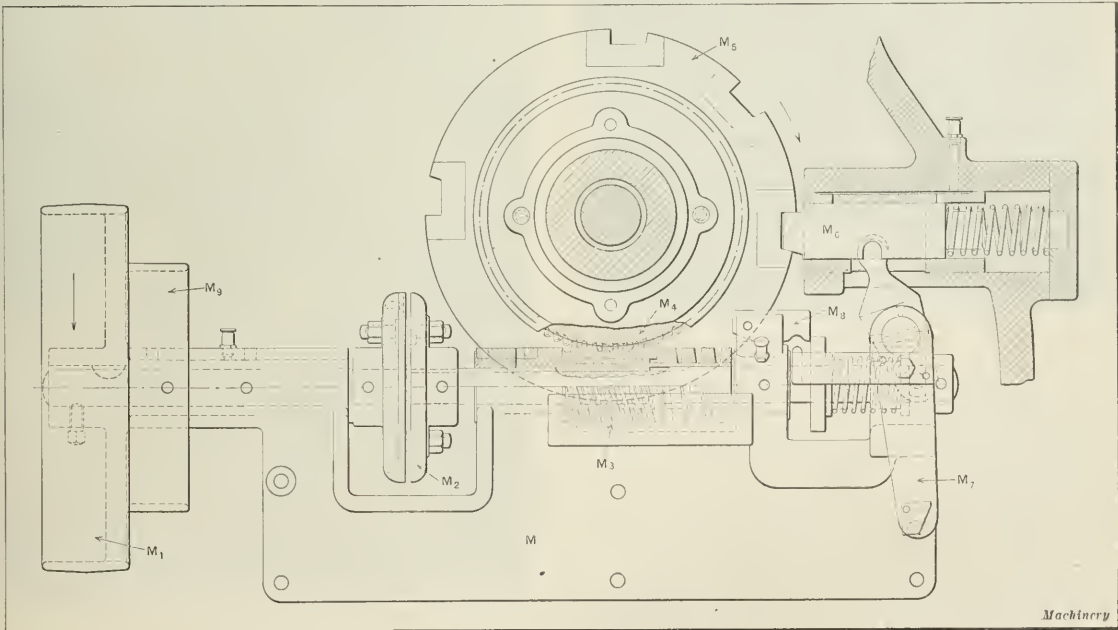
Sectional View, showing Revolving Mechanism for indexing Turret on Gridley Single-spindle Automatic Turret Lathe
